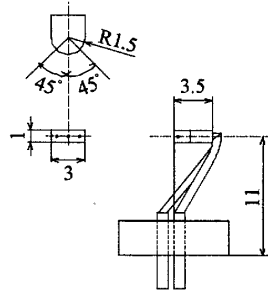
Head geometry of cobra-type three-holes yaw-meter.
